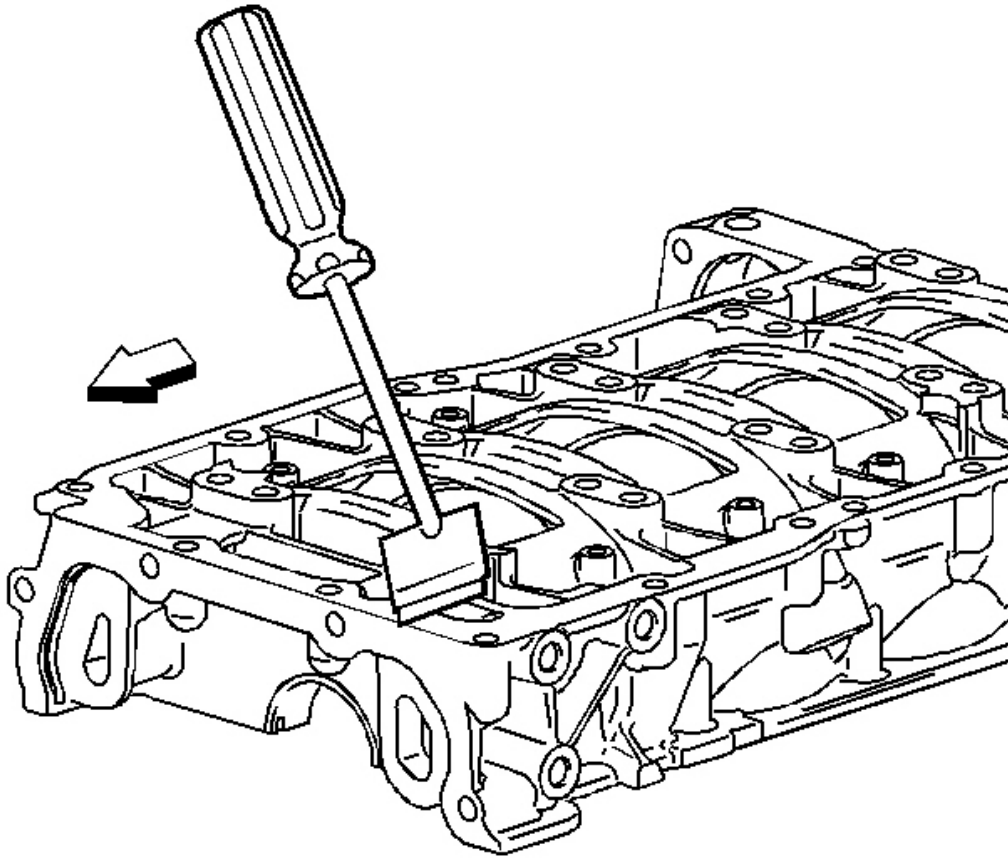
Cleaning Sealing Material From The Gasket Mating Surfaces On The Lower Crankcase Oil Pan Side
